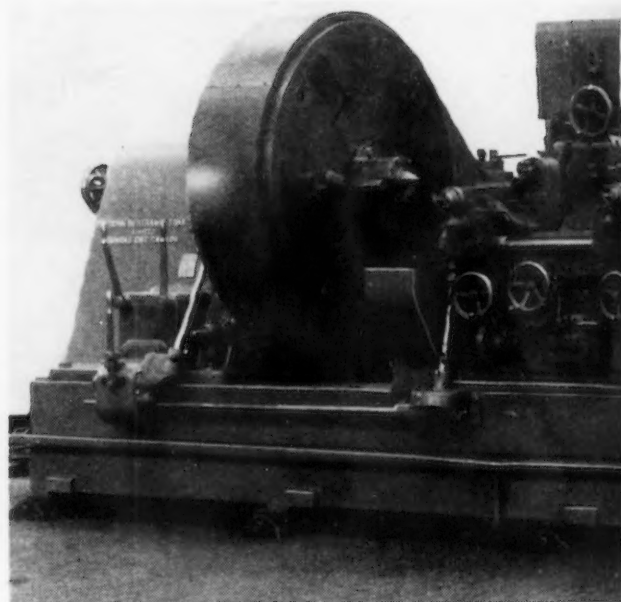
shows a general view of one of these machines, which is equipped with outside journal turning and grinding attachments for turning and grinding the outside journals on locomotive trailer sets. Fig. 2 shows a machine without the outside attachments. The Niles 90-in. locomotive journal turning lathe described in the Feb. 28, 1935, issue of THE IRON AGE
